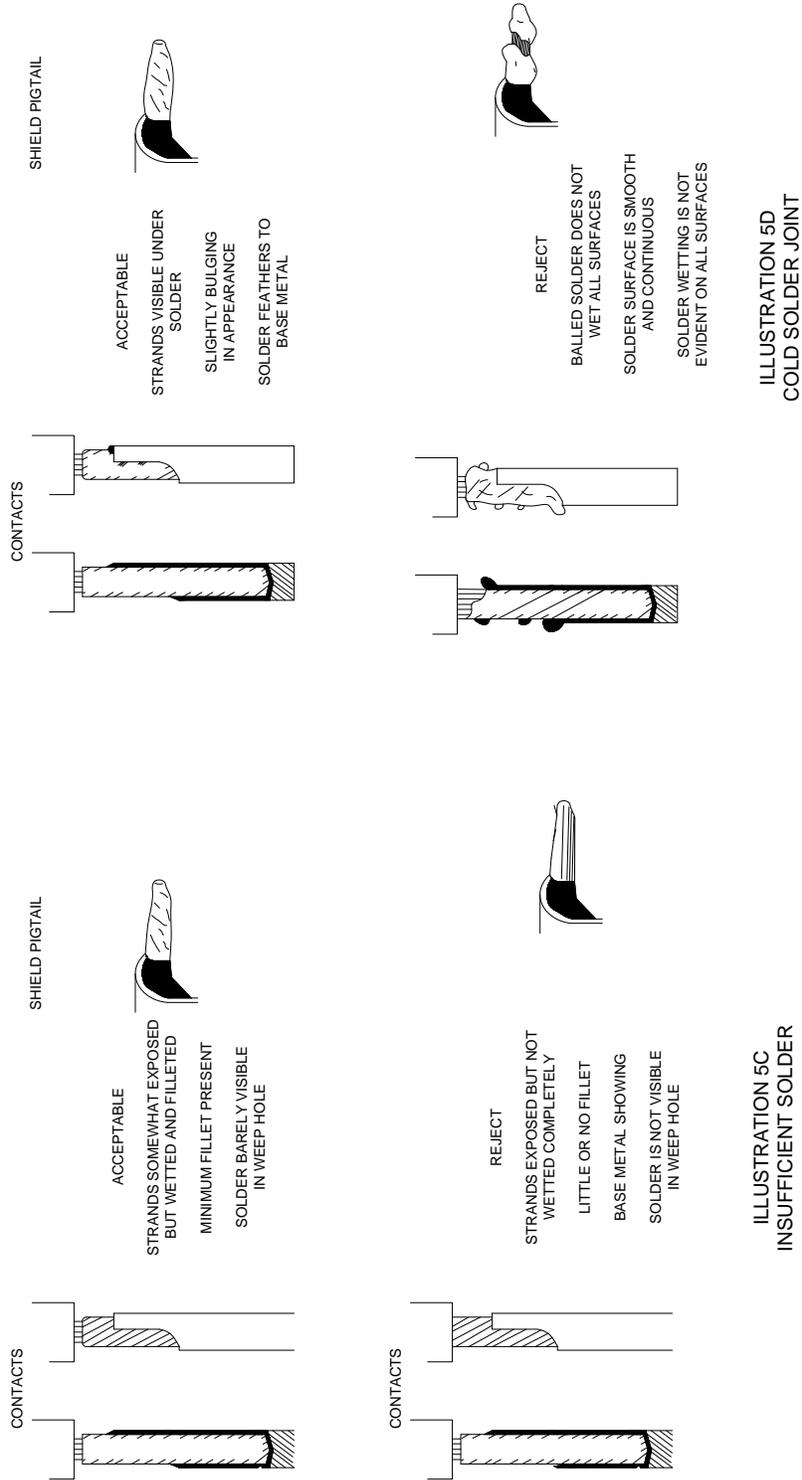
A6. Conductor contact soldering techniques - Continued.
